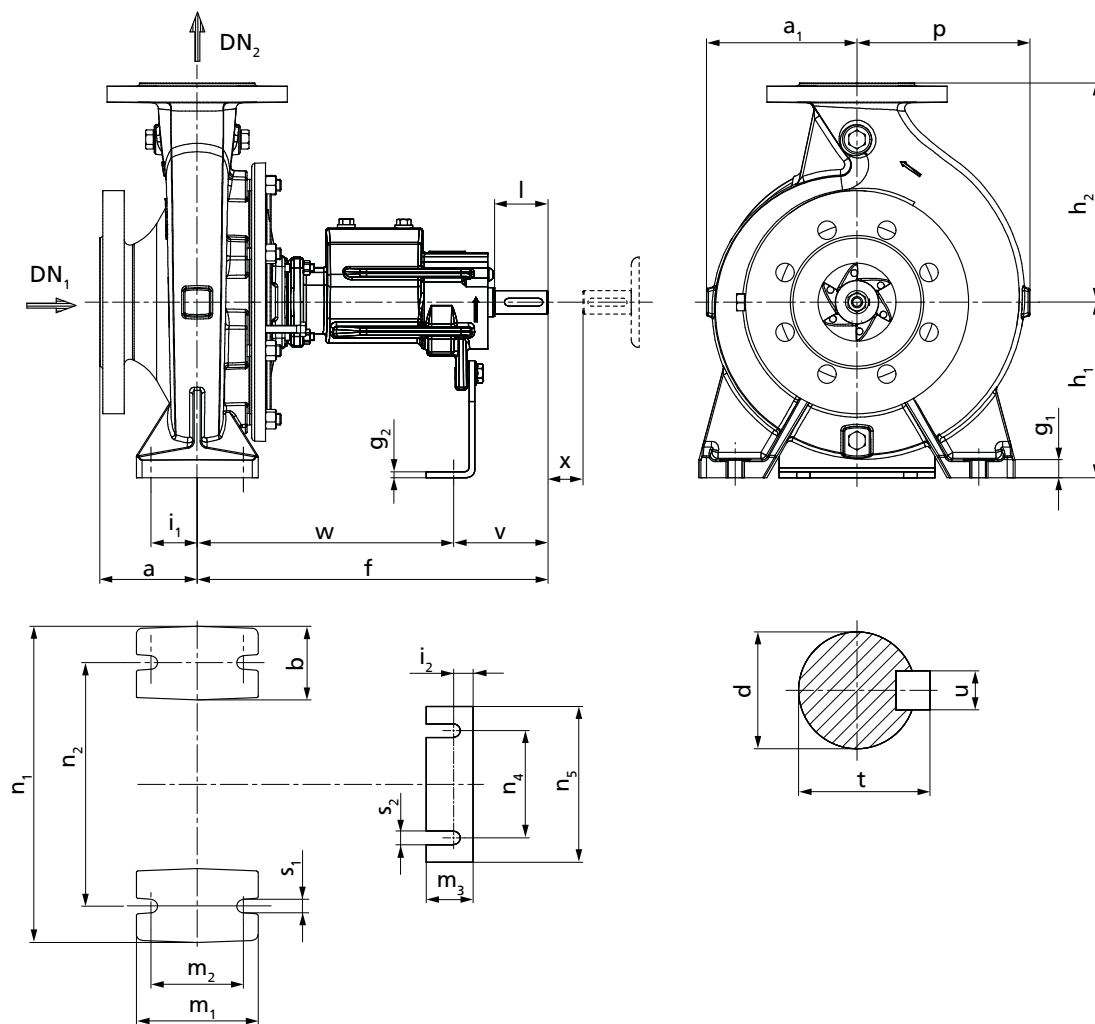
Dimensions of Etanorm SYT pump (Fig. 0)
